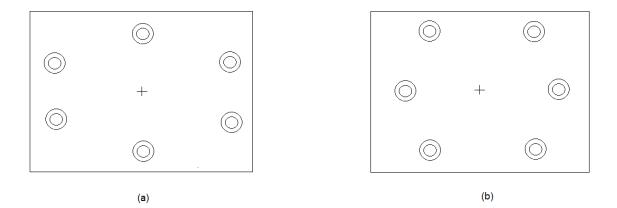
(a) Odd arrangement of holes for rectangular plates, (b) Even arrangement of holes for rectangular plates.
